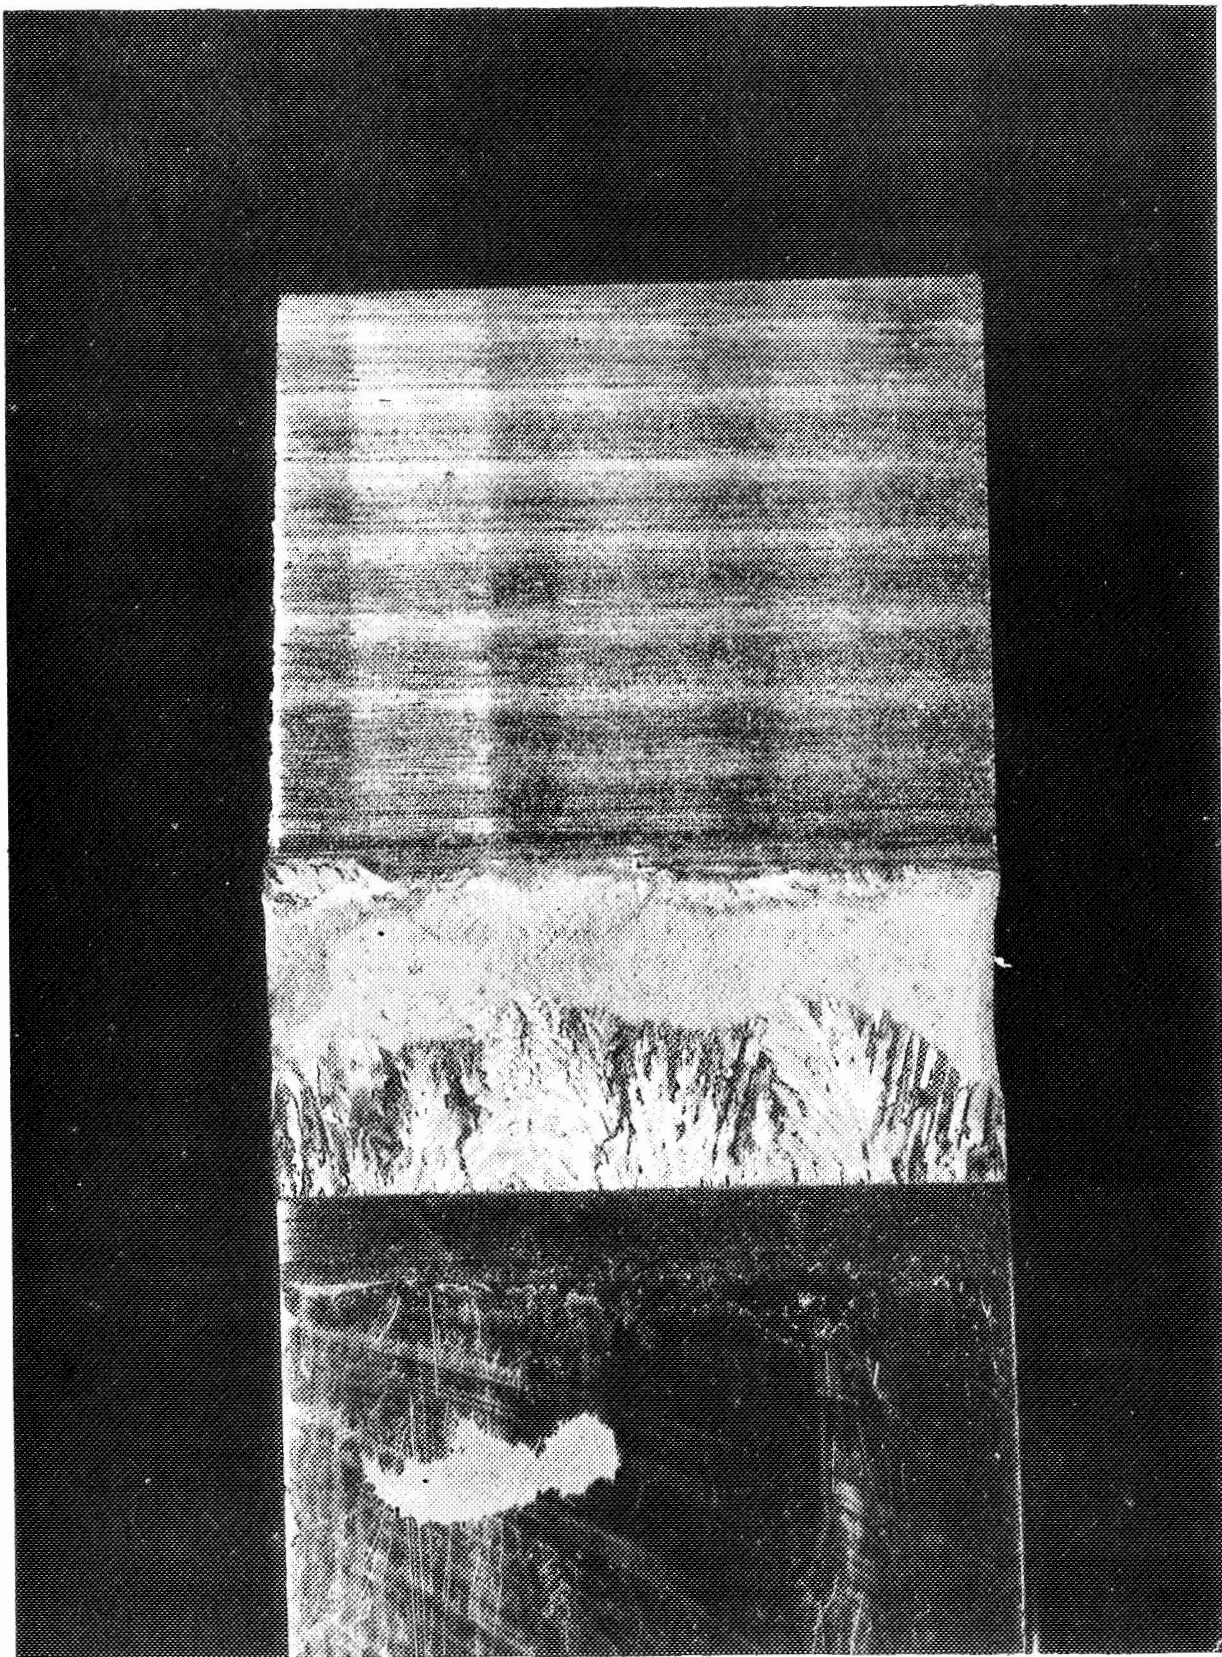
Fracture Surface of Sustained-Load, Welded X7007-T6 Specimen
